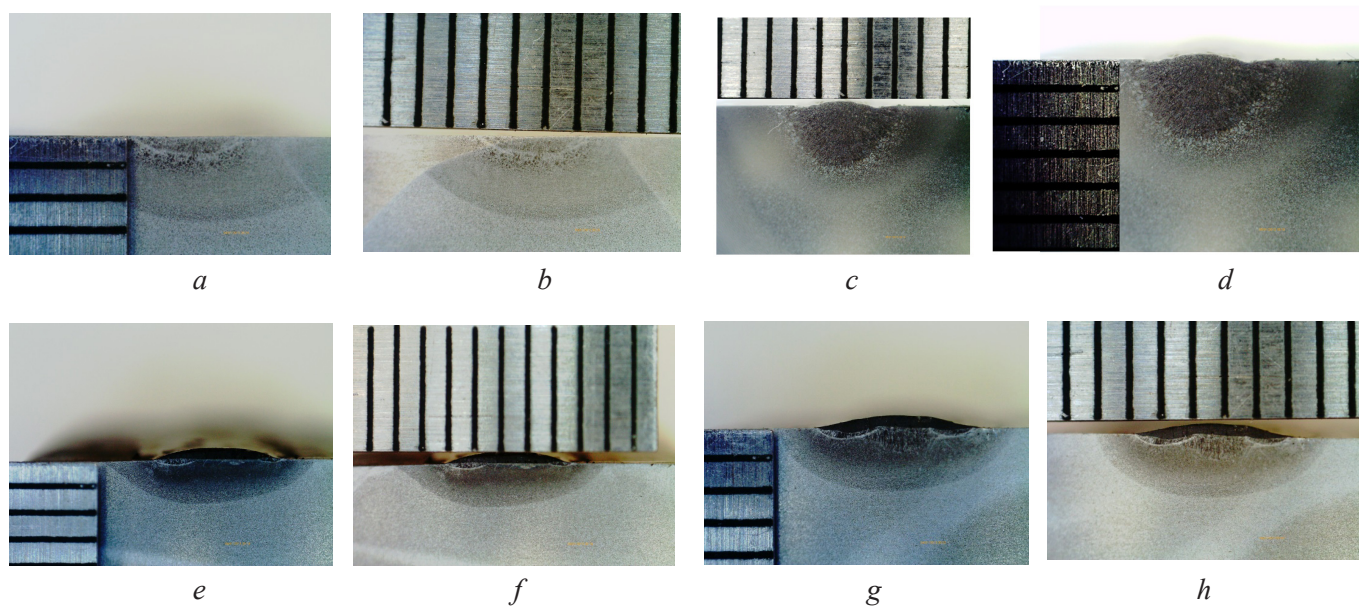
Cross-sections of the weld zone after *FB-TIG* processing:
